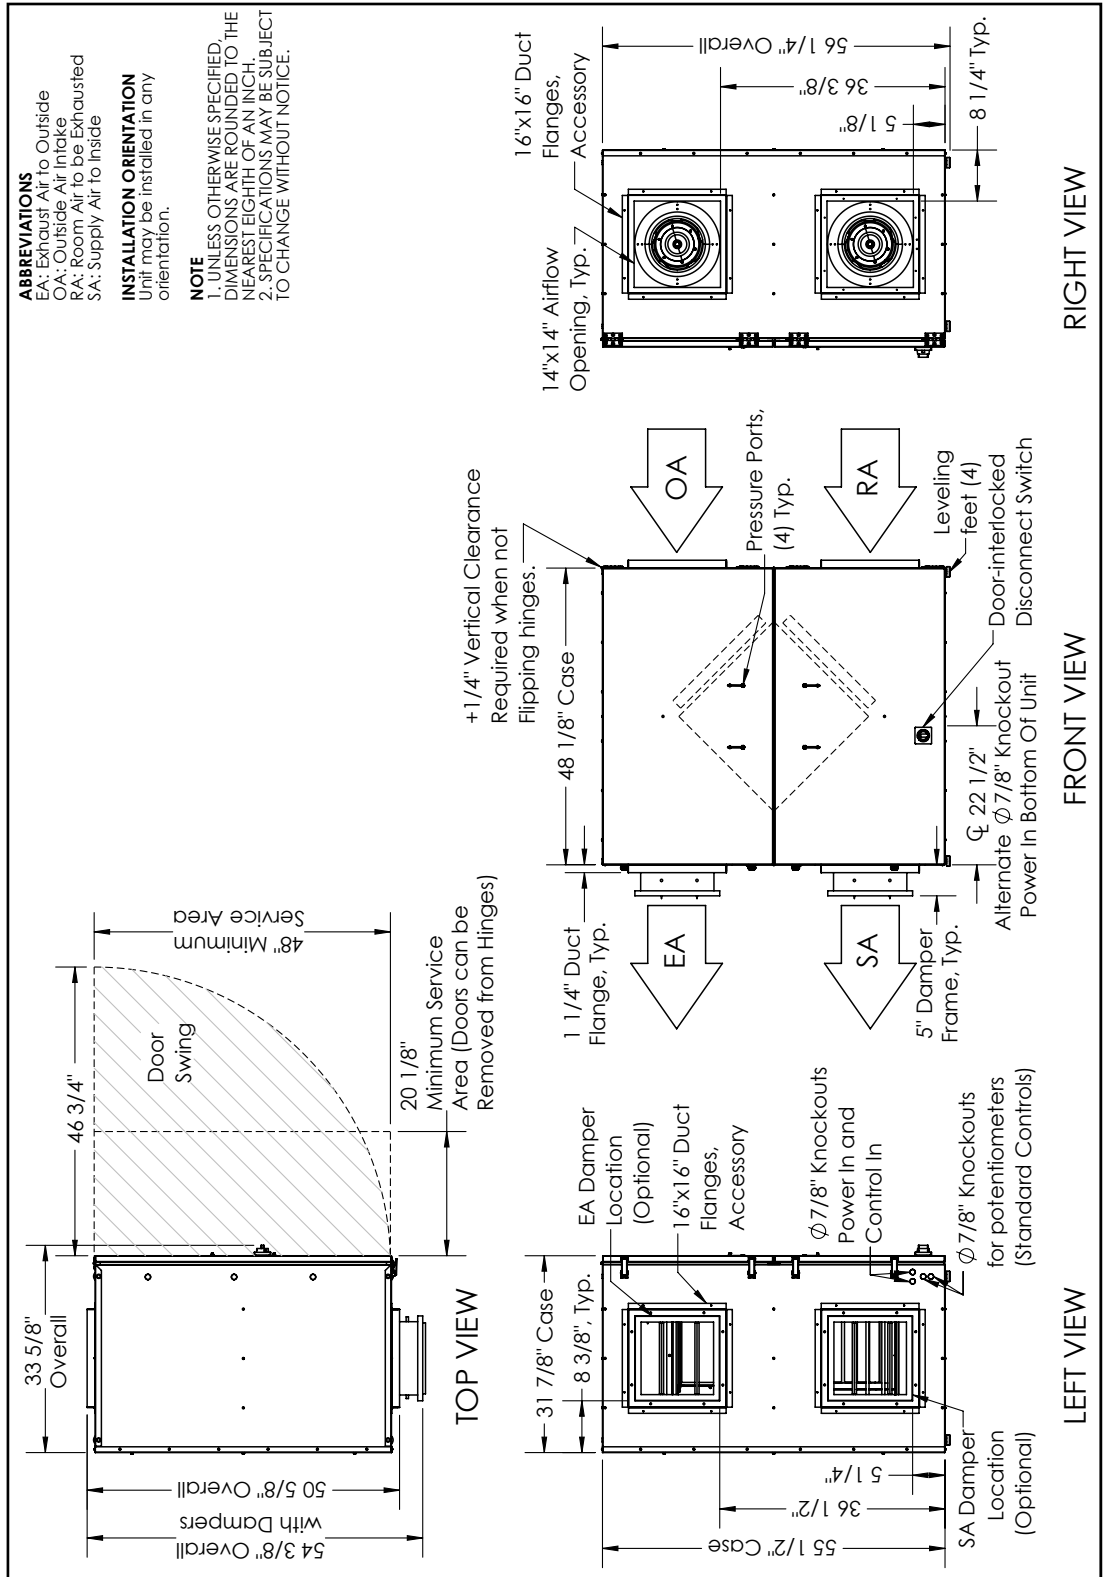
HE10INH DIMENSION DRAWING (HORIZONTAL AIRFLOW ORIENTATION)
